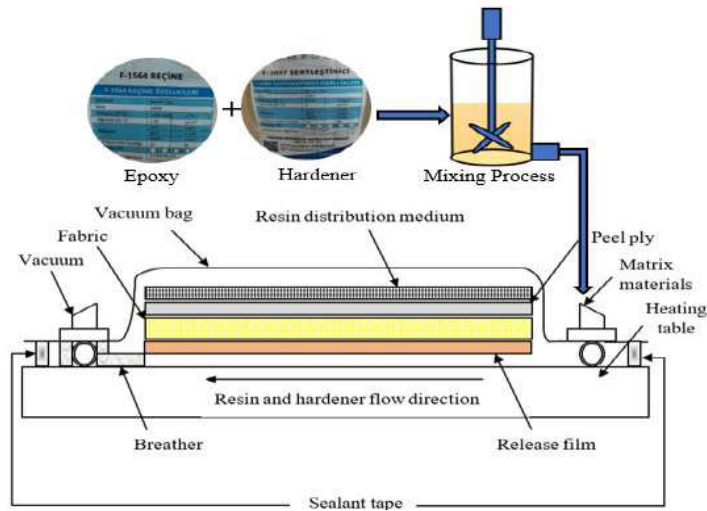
A schematic view of vacuum assisted resin infusion moulding technique
